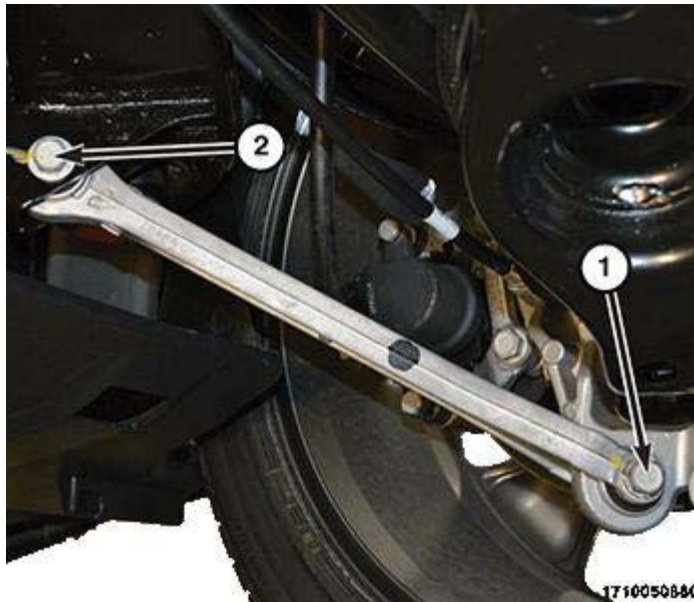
Compression Link To Knuckle Bolt & Compression Link To Crossmember Bolt
